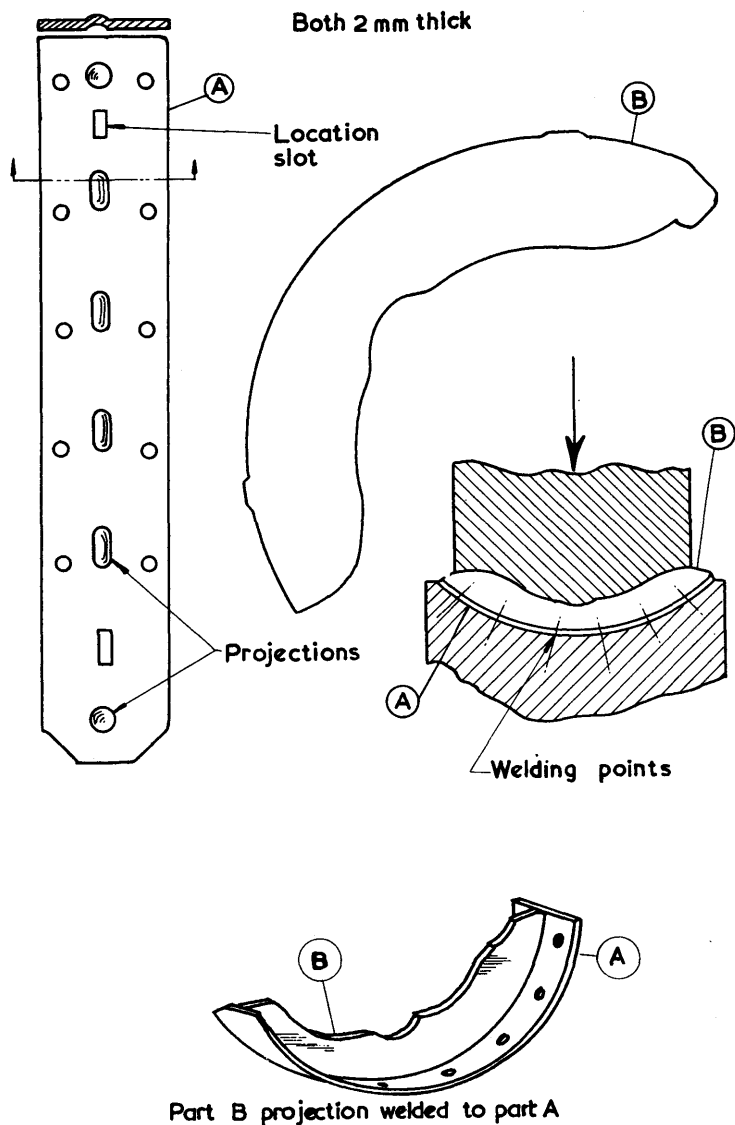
Mild-steel Pressings for Brake Shoe.
